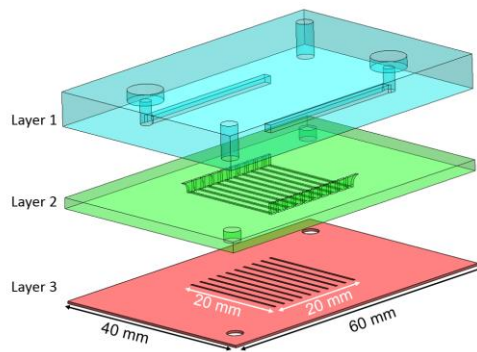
LSR 2, parallel channels, exploded view with layer indication
